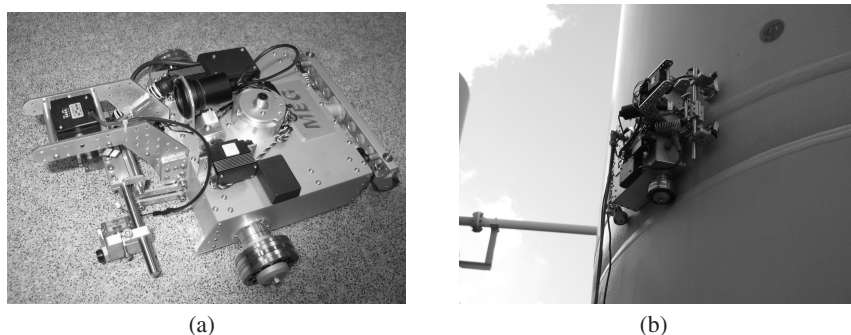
The robot: (a) with additional sensor modules, b) following the weld
